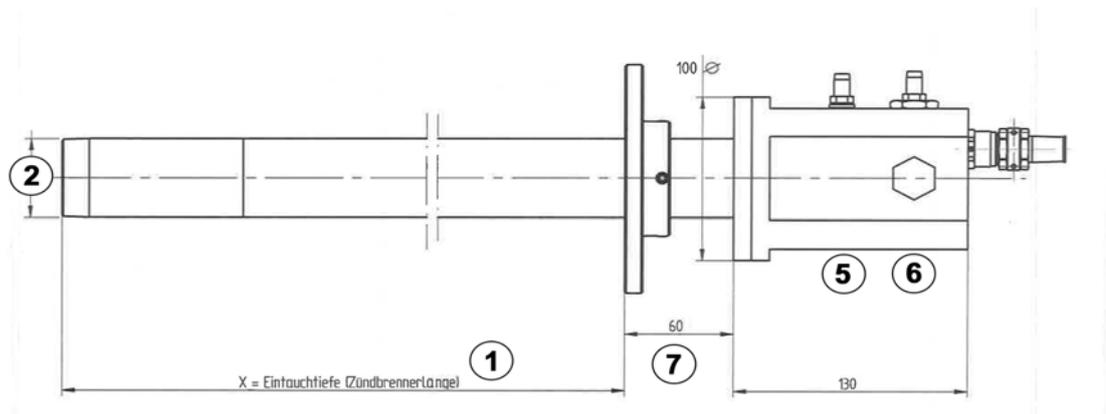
Dimensions of GFI48 pilot burner design C
